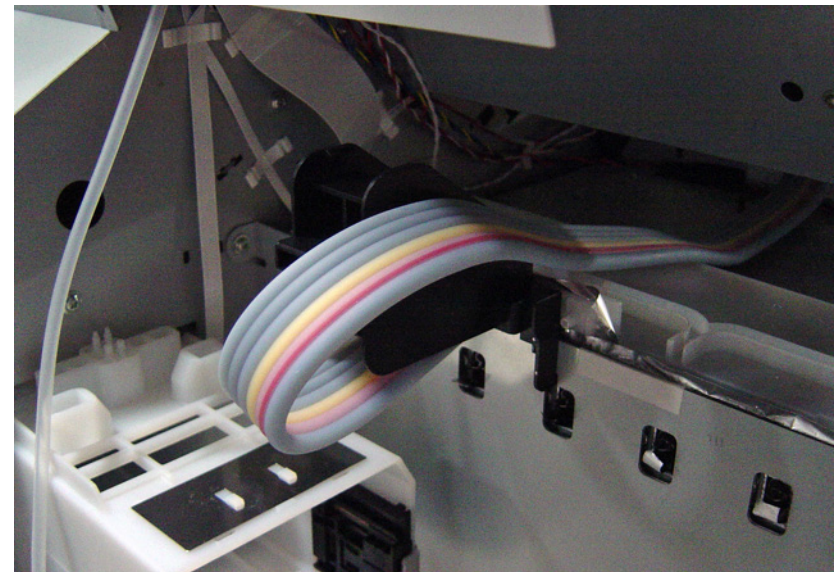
Releasing the Waste Ink Tube and Pressure Tube (after released)
